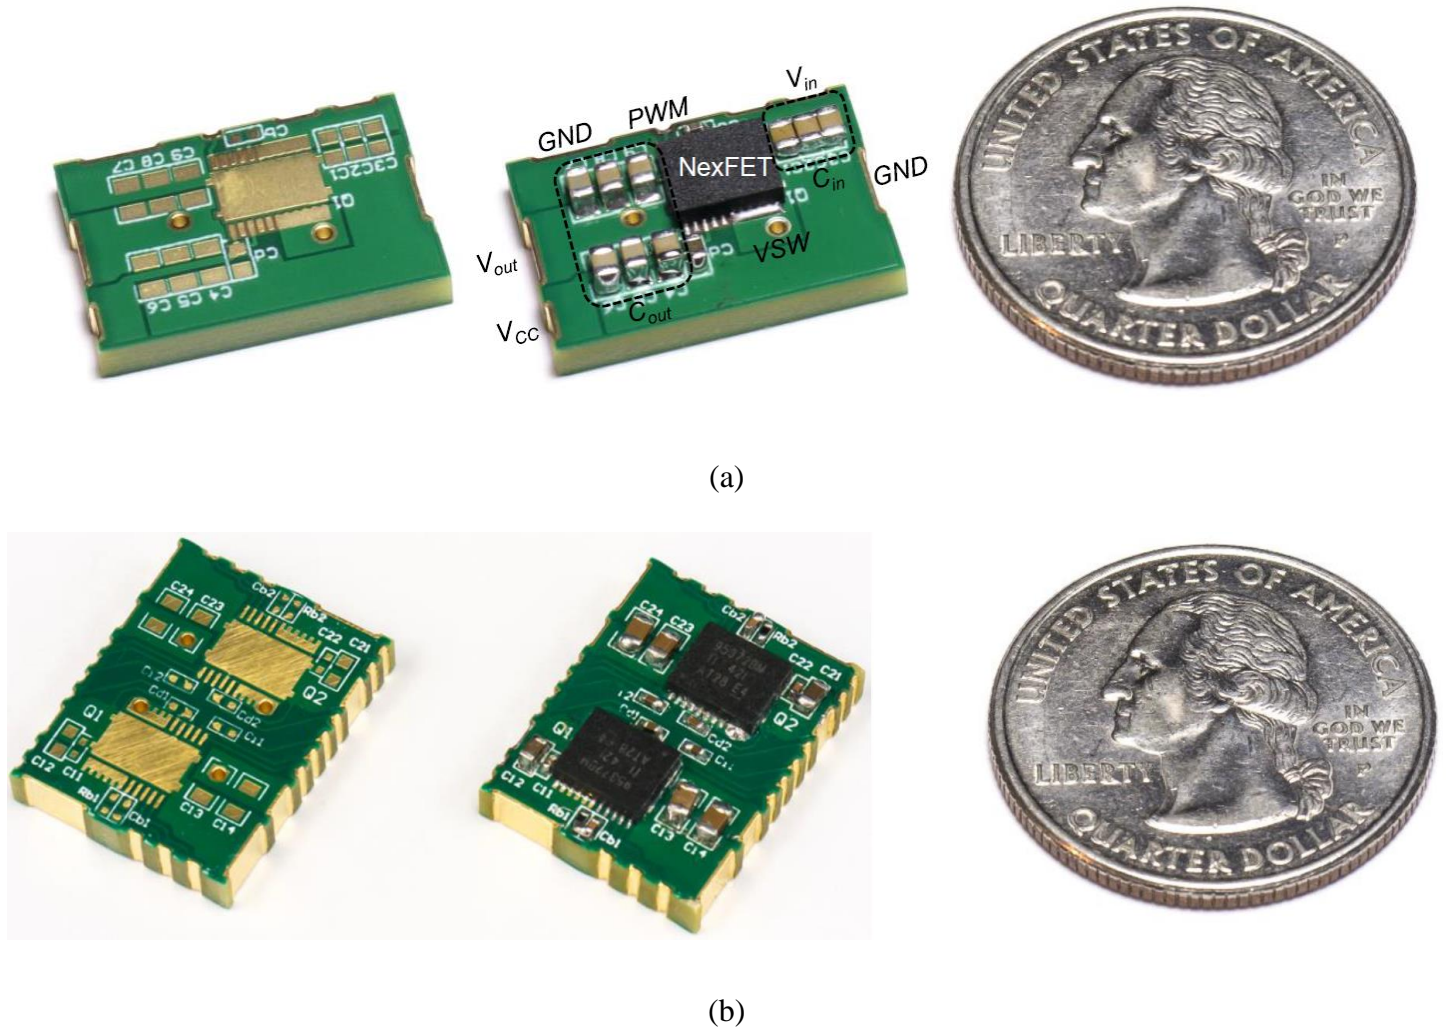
Prototype of Single-phase (a) and two-phase coupled (b) PCB integrated POL Module.
